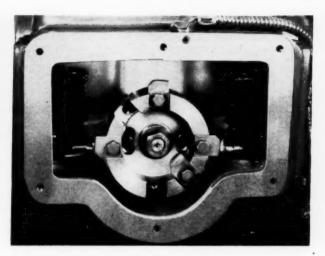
DOG PLATE ON CAM-DRUM ASSEMBLY
